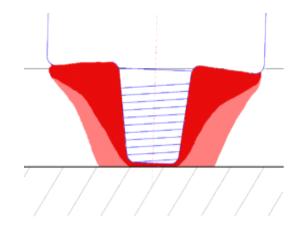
A drawing showing the plunge depth and tilt of the tool The tool is moving to the left.
